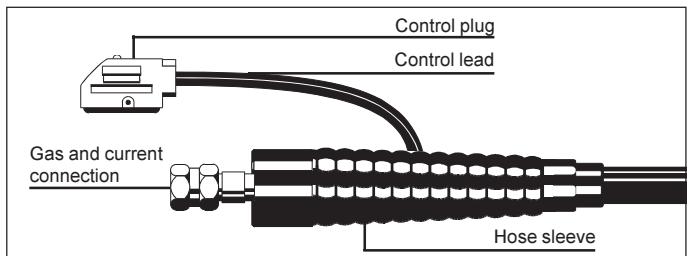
Design with central burner connection GWZ: Torch connection gas-cooled
